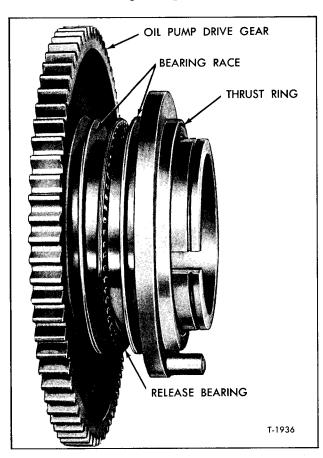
Oil Pump Drive Gear Assembled To Clutch Diaphragm Spring
